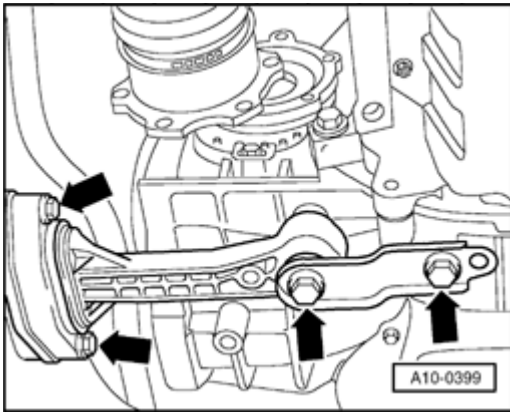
Unbolting Pendulum Support And Left/Right Side Drive Axles From Transmission Flange
